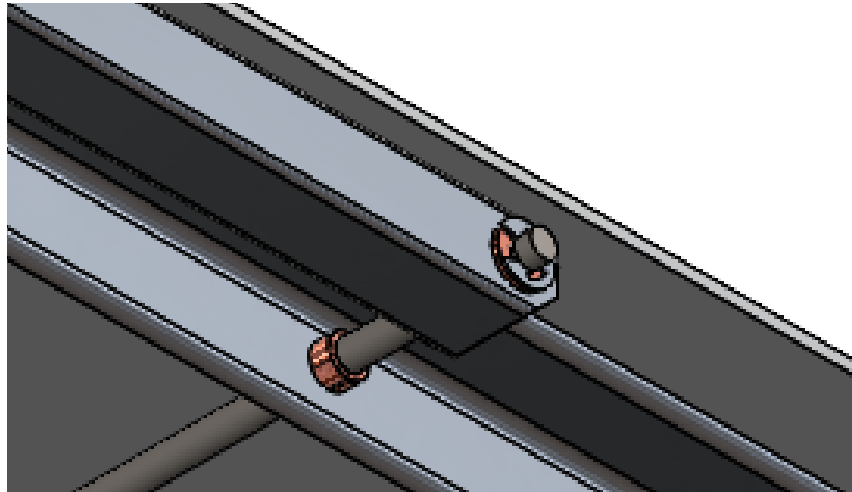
The 1/4" retaining ring assembled to the ramp shaft.
